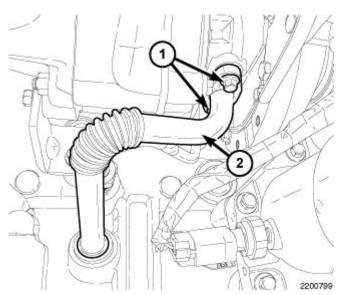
Engine Oil Filter Housing Courtesy of CHRYSLER LLC
